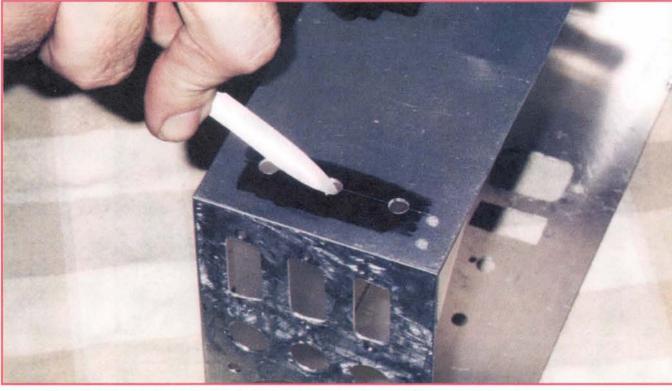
Using a triangular hand scraper to remove the metal burr made by drilling and reaming.
